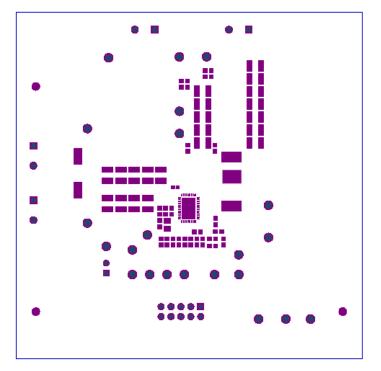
PWR-847EVM Top Solder Mask (Top View)
